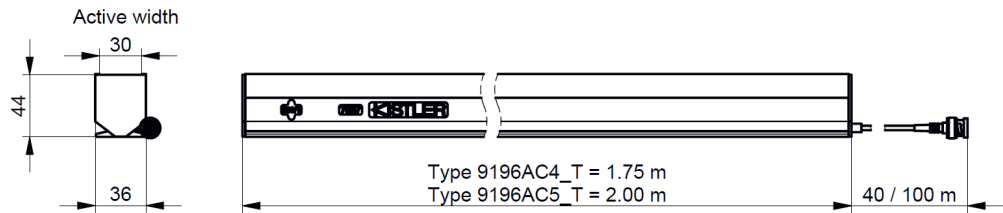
Dimensions of Lineas Compact sensor (Type 9196ACxxT)
